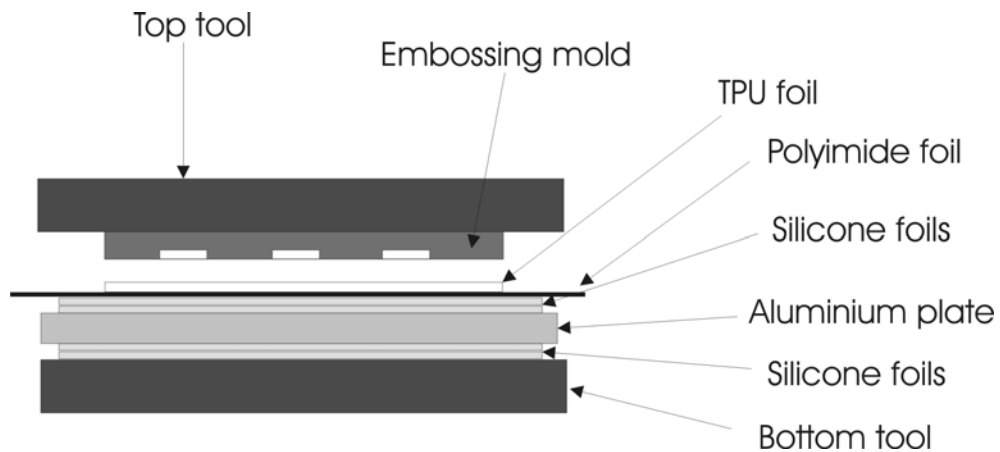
Scheme of the assembly for single-side hot embossing of TPU fluidic devices.
